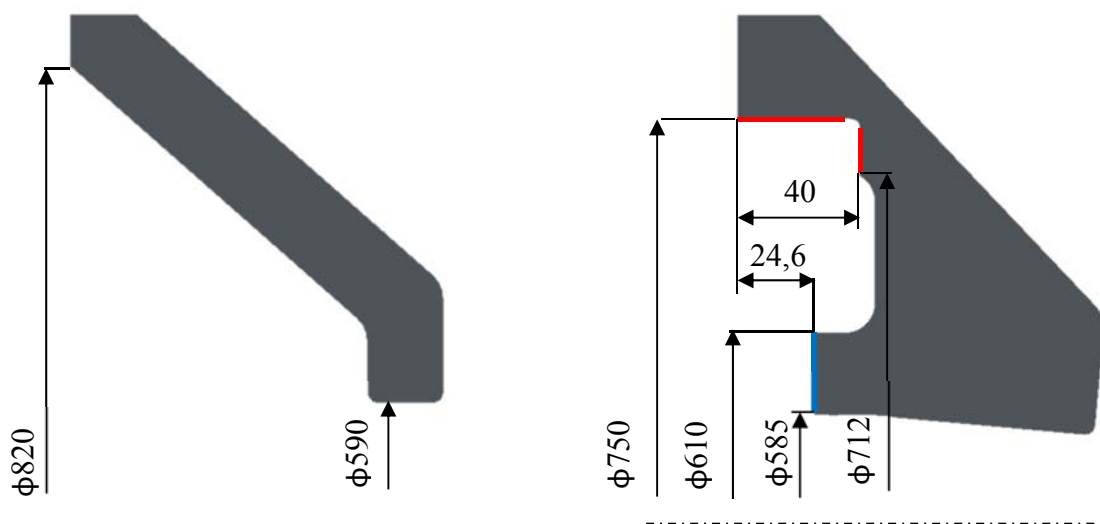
Left side: old door cross section, right side: modified door cross section with highlighted dimensions [mm], red colored lines are contact surfaces for curved gear rack, blue line is contact surface for curved rail
